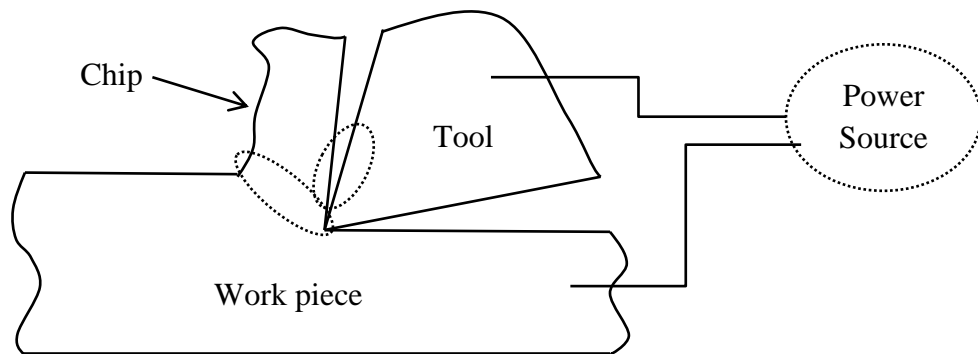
Structure of tool and workpiece in electric arc machining [66]
